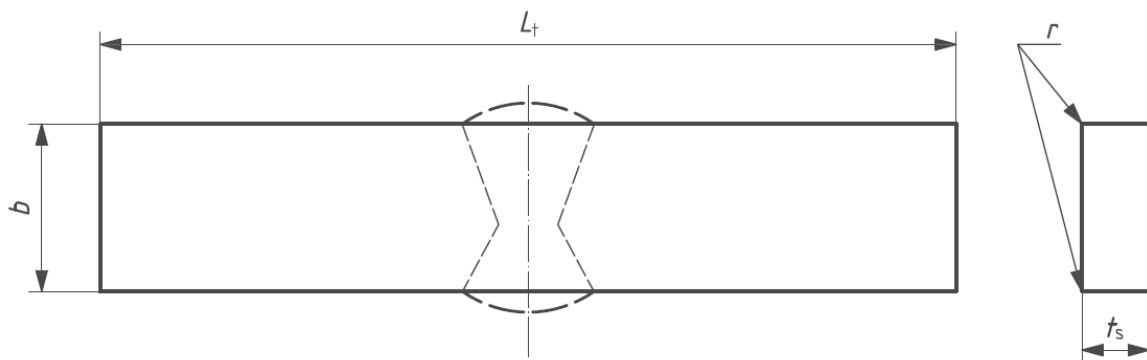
Transverse side bend test specimen for a butt weld (SBB).
